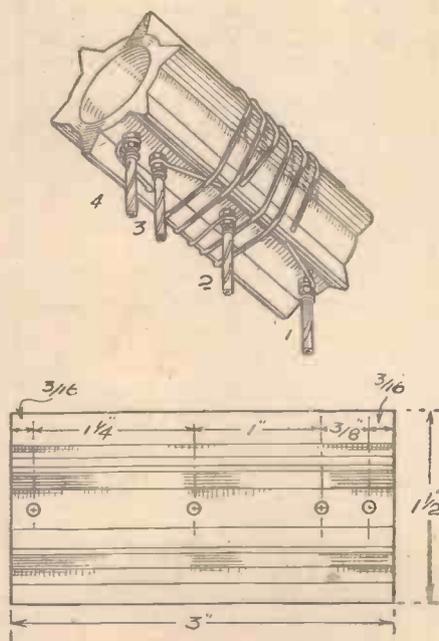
How the short-wave coil is wound, and drilling dimensions for the pins.
